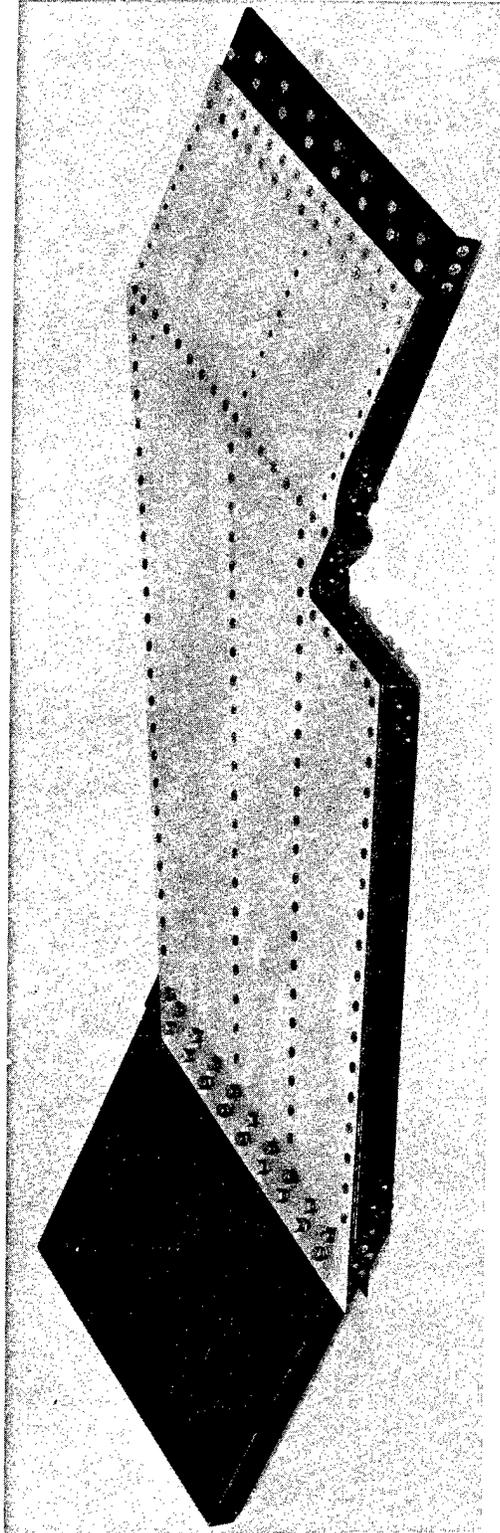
W B/AI WING SUBCOMPONENT FINAL ASSEMBLY
